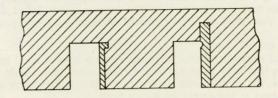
Two methods for installing cast iron wearing rings in steel pistons
